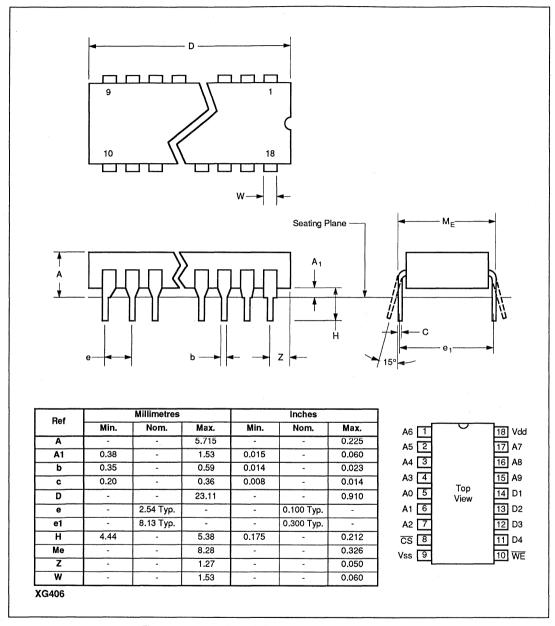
18-Lead Ceramic DIL (Solder Seal) - Package Style C
